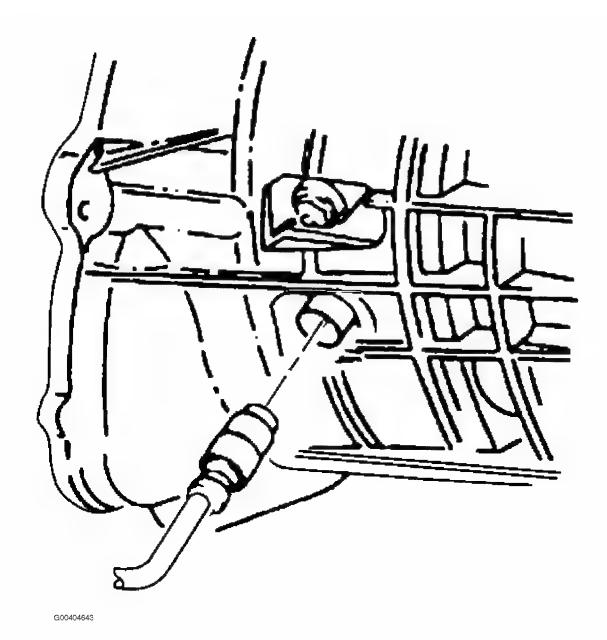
Disconnecting/Connecting Hydraulic Clutch Line Quick Connect Courtesy of GENERAL MOTORS CORP.
